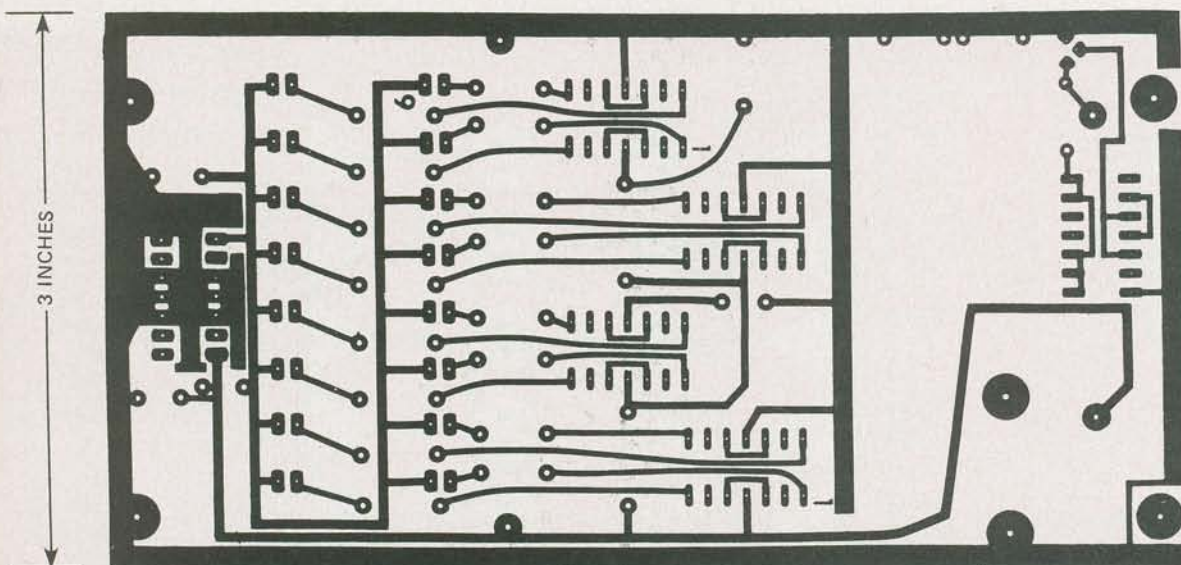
"FOIL-SIDE" of display board. Note that, while board is double-sided, holes need not be plated-through.
